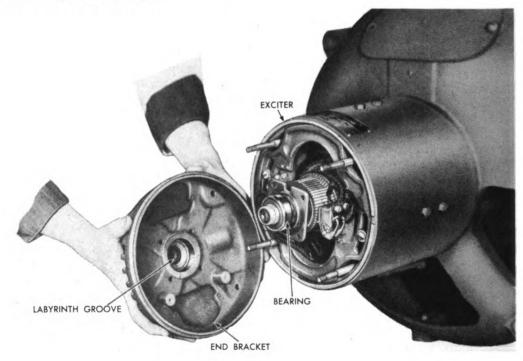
Removing Exciter End Bracket, showing Labyrinth Groove.
